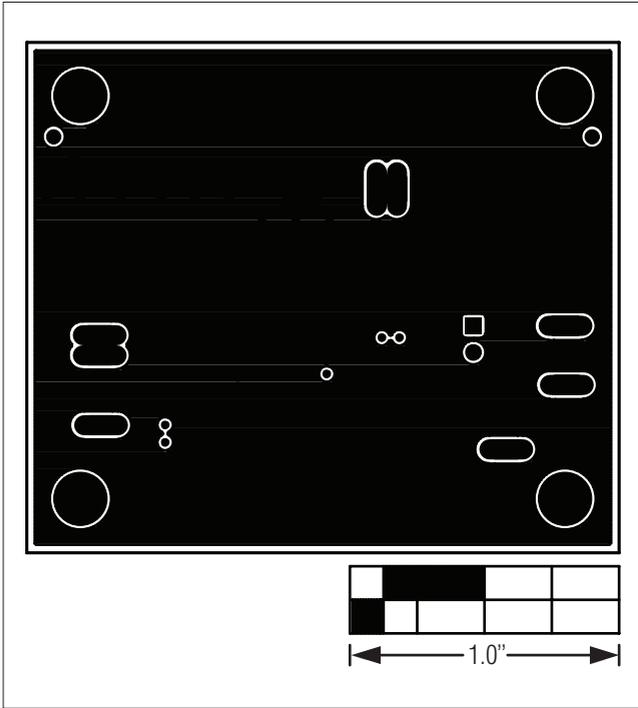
MAX15051 EV Kit PCB Layout—Inner Layer 3
